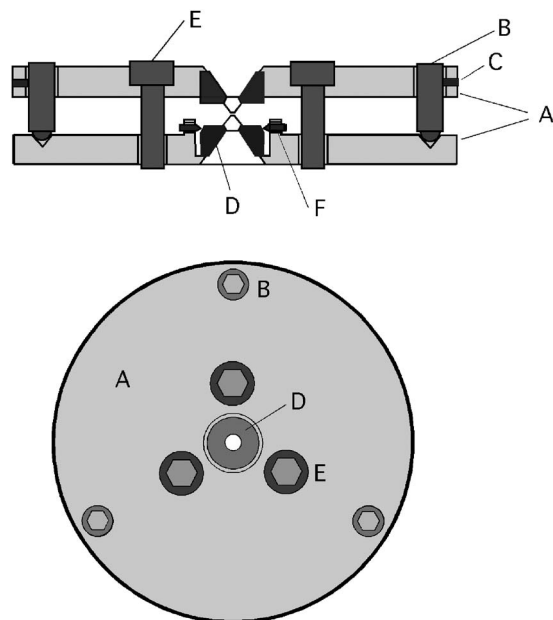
Schematic drawing of the diamond cell. (A) Maraging steel plates (DIN 2709, HRC 55) with thickness of 5 mm and diameter of 50 mm, (B) alignment screws (kinematic mount) (M6/0.5 mm) fixed by set screws (C) (M3/0.5), (D) tungsten carbide supports for the diamond anvils, (E) screws to bend plates to generate pressure (DIN 2709, HRC 55, fine thread M5/0.35 mm), and (F) set screws for lateral alignment of diamond seat (M2.5).
